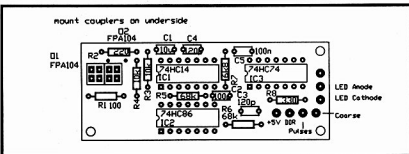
Circuit board layout, shown actual size. (Drawn by Keith Gooley VK5OQ)
